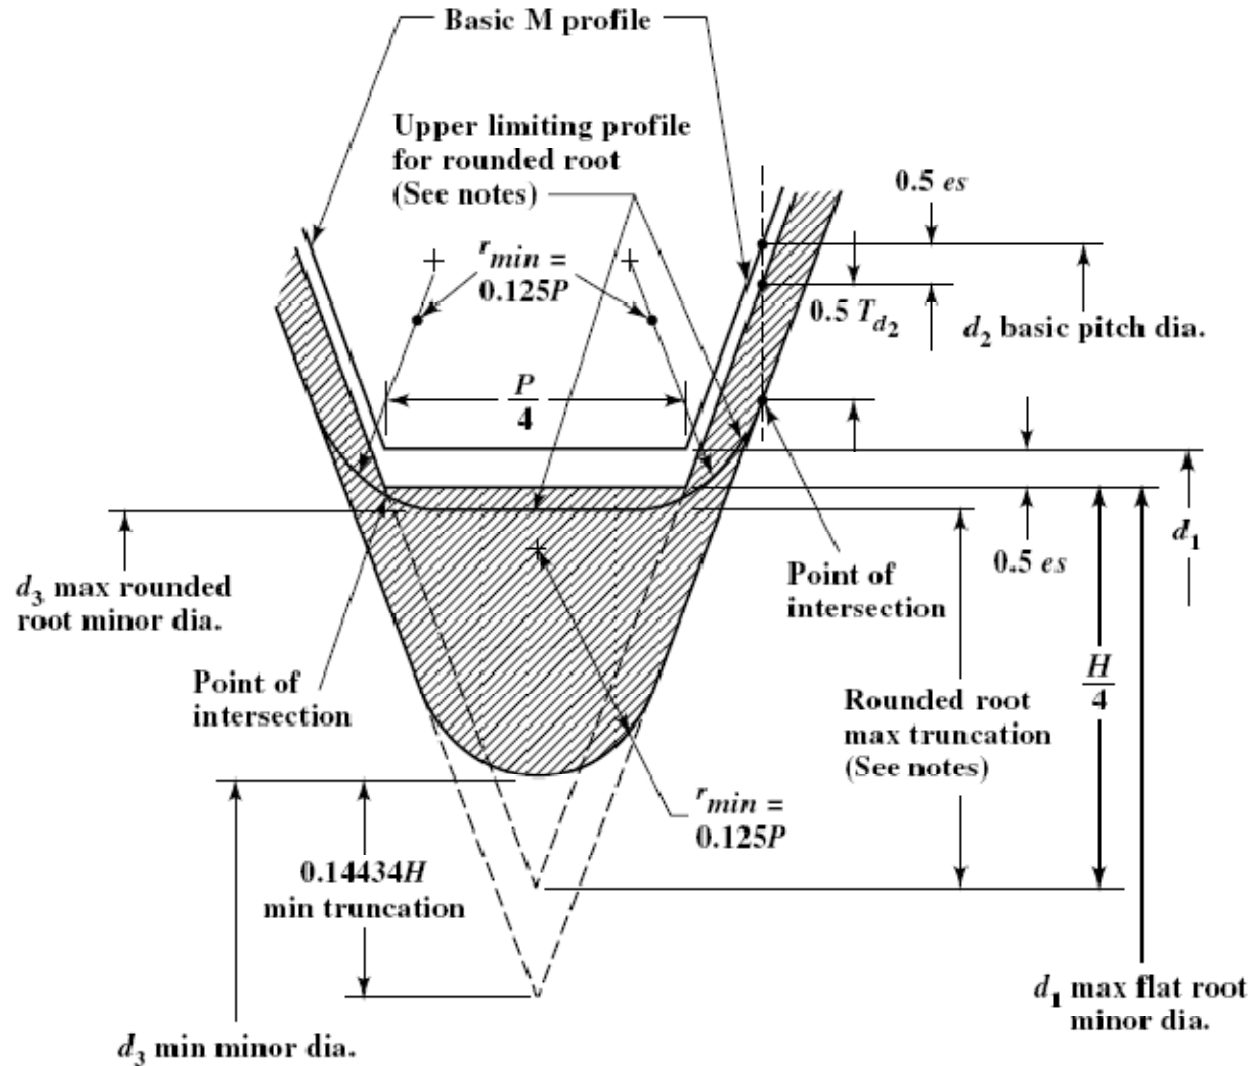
M Profile, External Thread Root, Upper and Lower Limiting Profiles for $r_{min} = 0.125 P$ and for Flat Root (Shown for Tolerance Position g)
